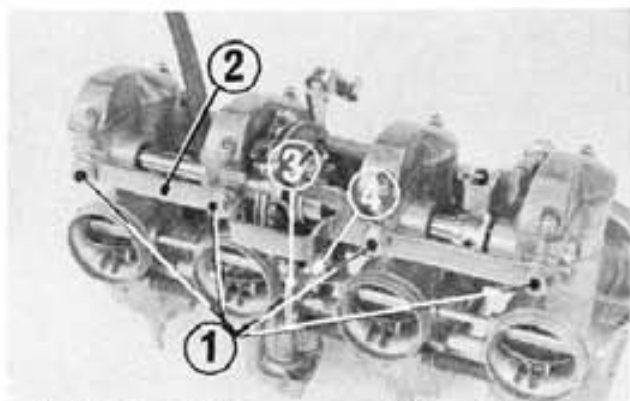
① Bolt ② Rear stay ③ Choke relief spring ④ Choke lever
